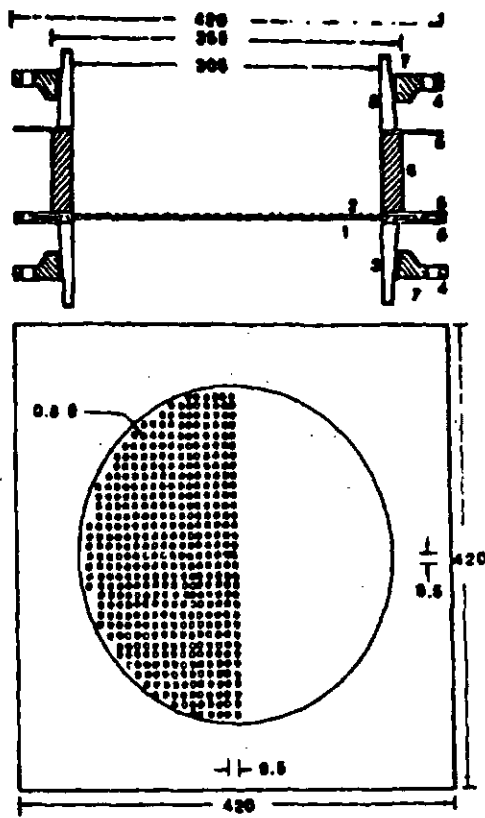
C. Design details of the perforated gas distributor plate for the 0.305 m diameter slurry bubble column. (1) perforated distributor, (2) stainless steel wire cloth, (3) bottom conical section, (4) flange, (5) gasket, (6) metal insert., (7) soft inserts, and (8) glass column. All dimensions are in mm.
